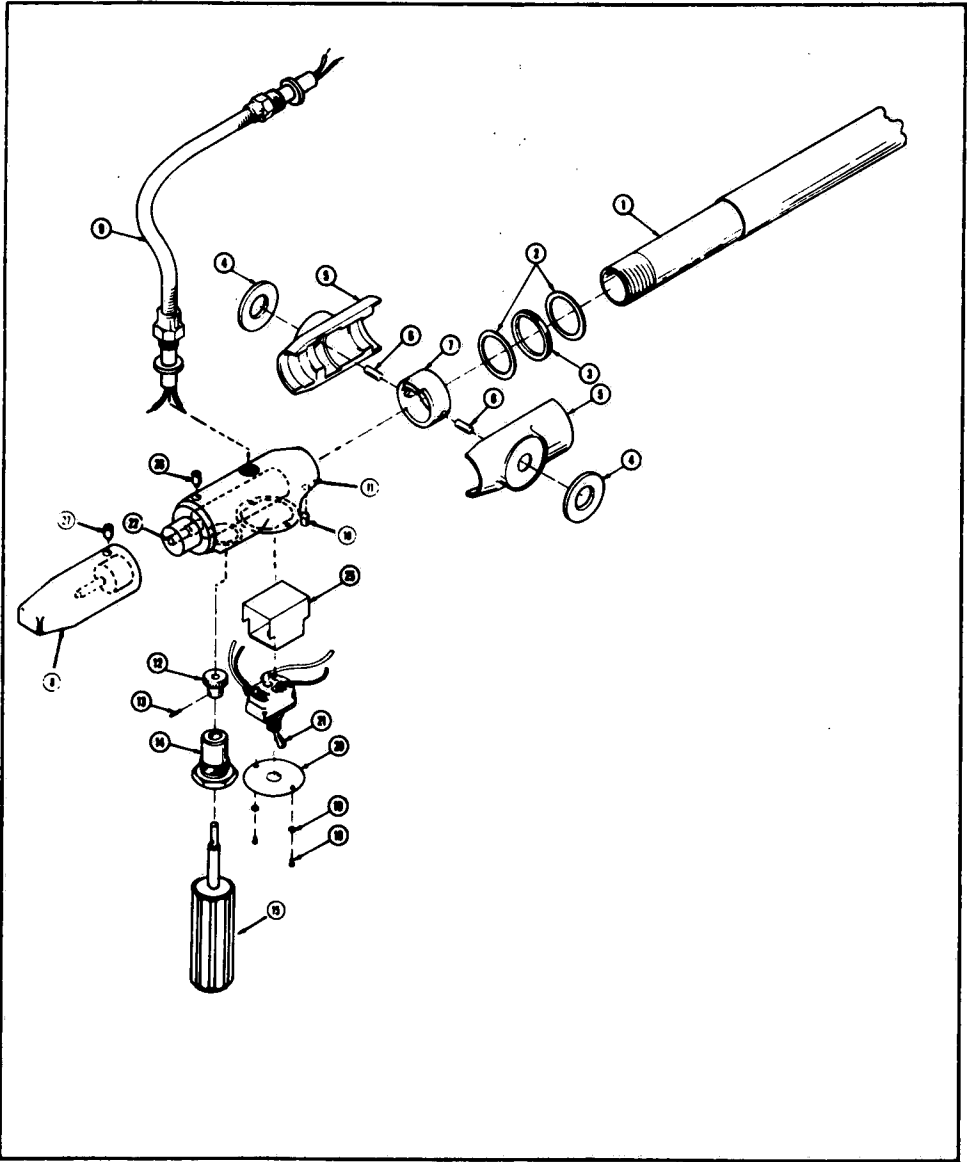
REMOTE CONTROL HOUSING AND CROSSARM ASSEMBLY.
